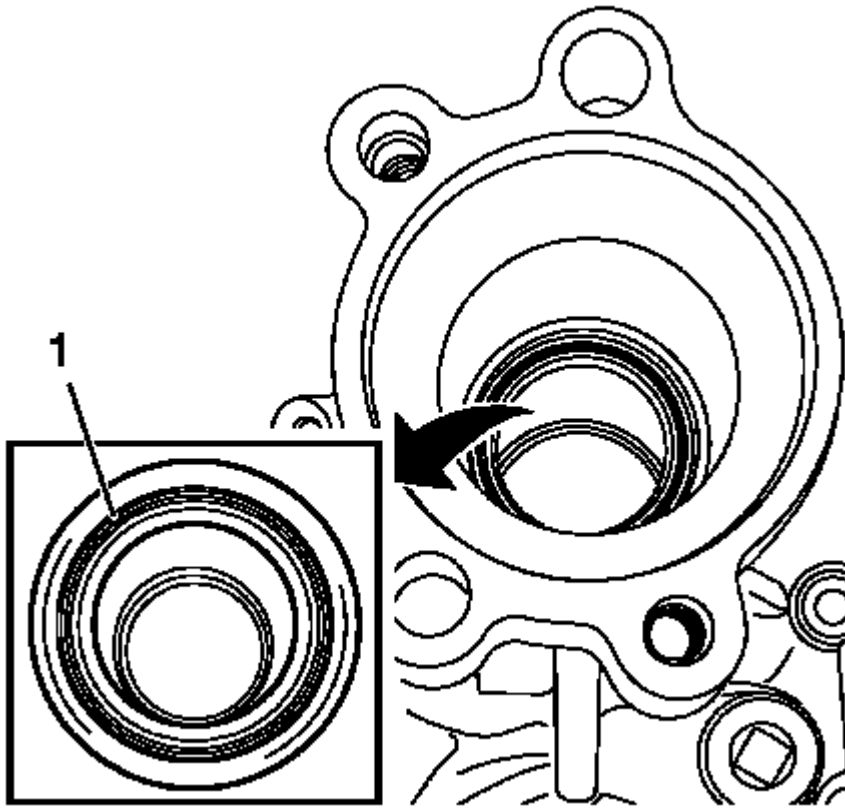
Identifying Front Wheel Drive Intermediate Shaft Seal
